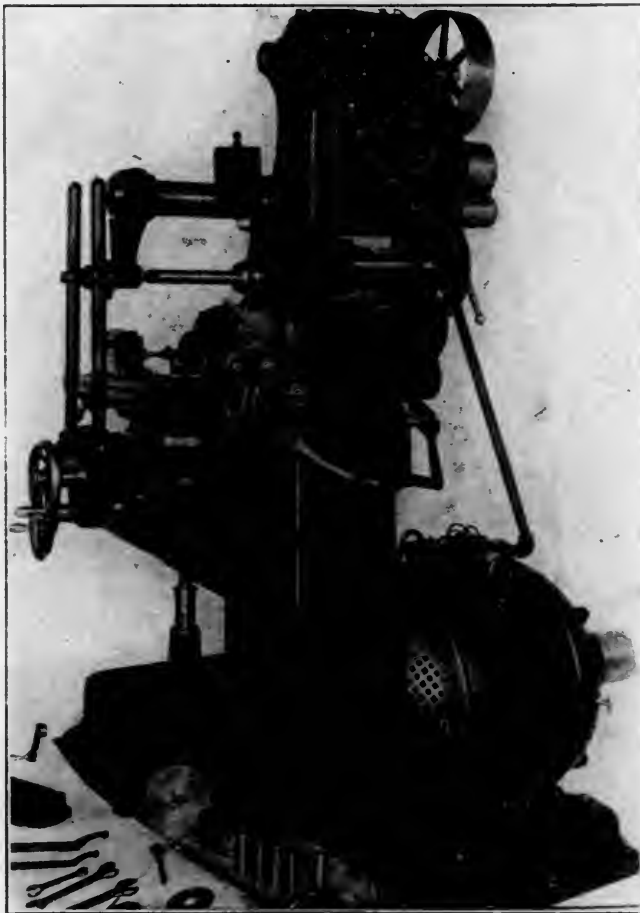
CONSTANT-SPEED DRIVE BECKER-BRAINARD UNIVERSAL MILLING MACHINE WITH CONE PULLEYS—STURTEVANT MOTORS.
